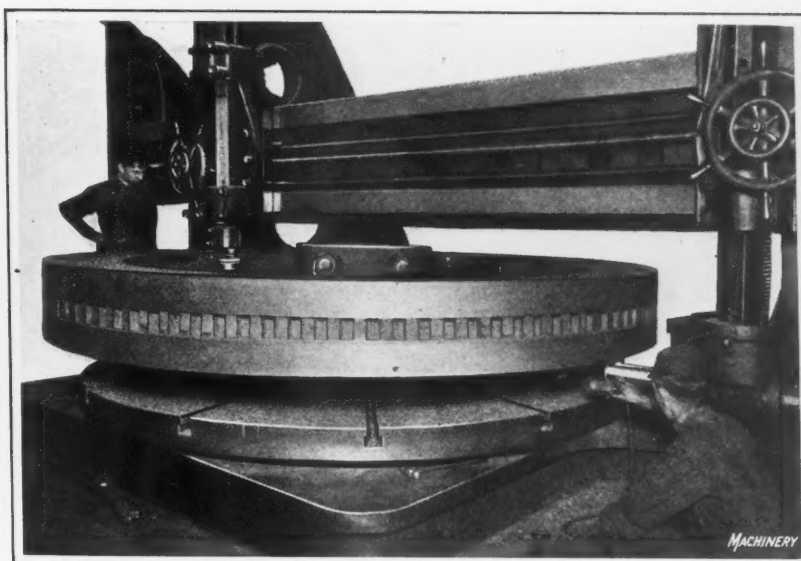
Facing Both Sides of Flywheel Rim; the Hole in the Hub is bored with the Same Set-up
